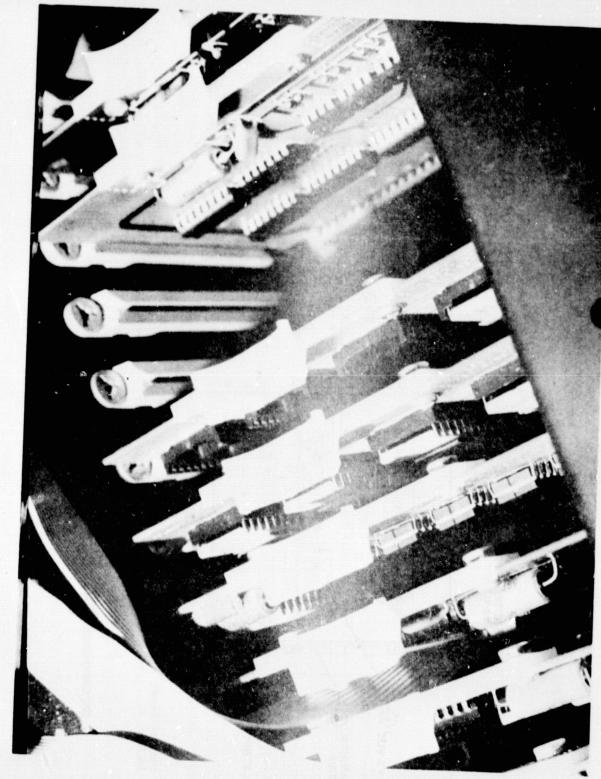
Plug-In Printed Circuit (PC) Board Assembly.
